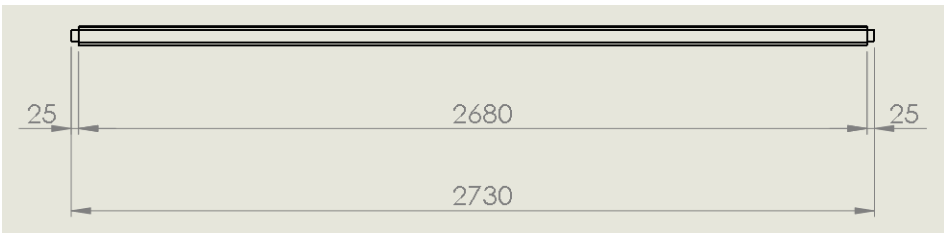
Drawing of lengths, [mm]. Assembly seen from above.
